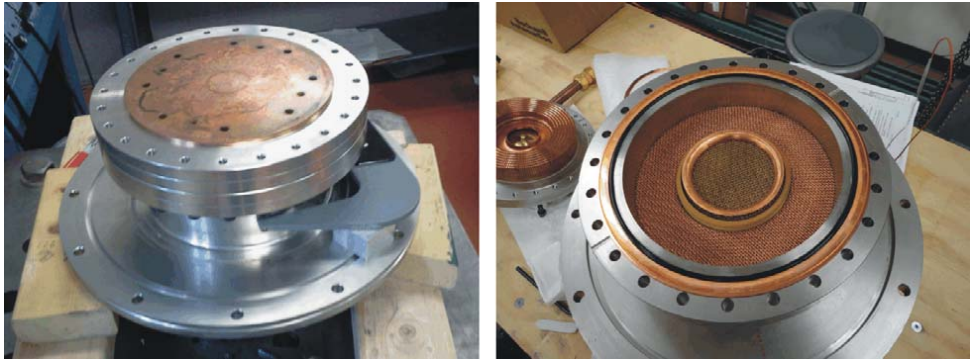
Test version of ‘362’ class coldfinger with cold flange on and off.
